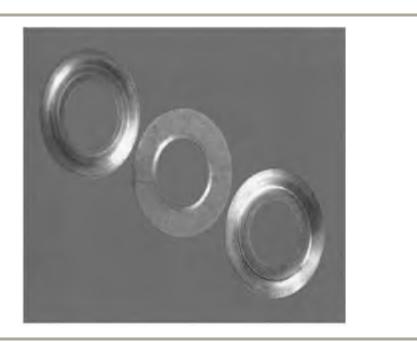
02142907Schwitzer. Wear grooves on mating surfaces of thrust washers. Center washer is new thrust washer.
